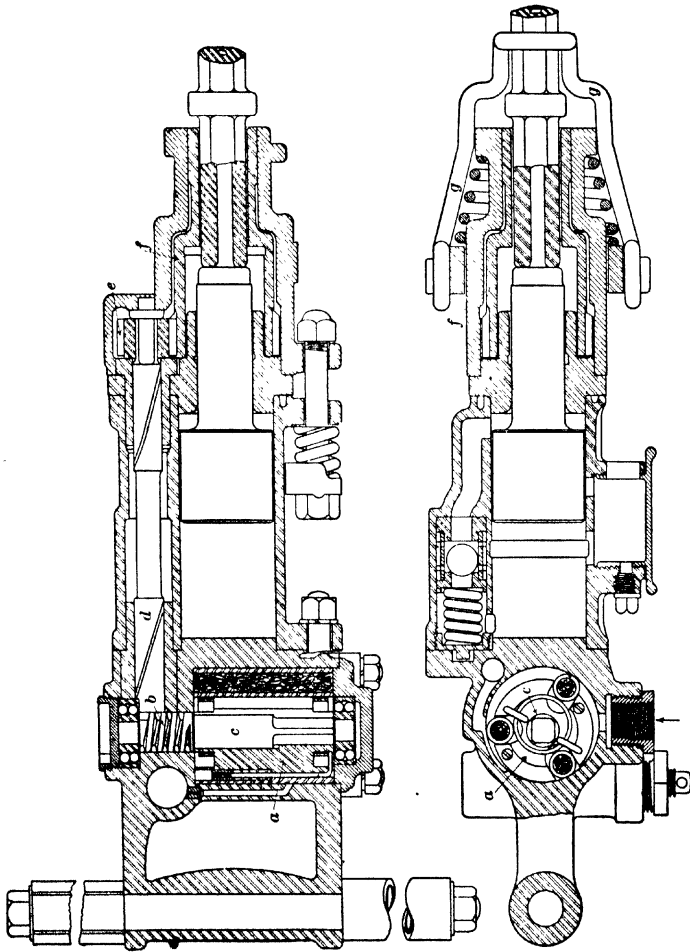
“Hummer” Drill Chicago Pneumatic Tool Co.
